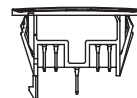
, VH3 & VH5 HOLE PLUGS (No wing serrations for ease of removal)
